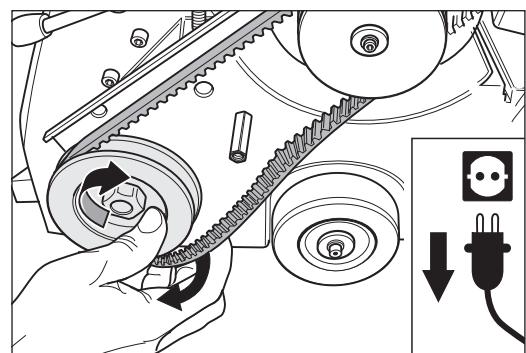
Allow the drive belt to run off the lower pulley. If necessary use the box wrench (see tool bag) to help you, but turn exclusively in the clockwise direction in order not to loosen the screw joint.
